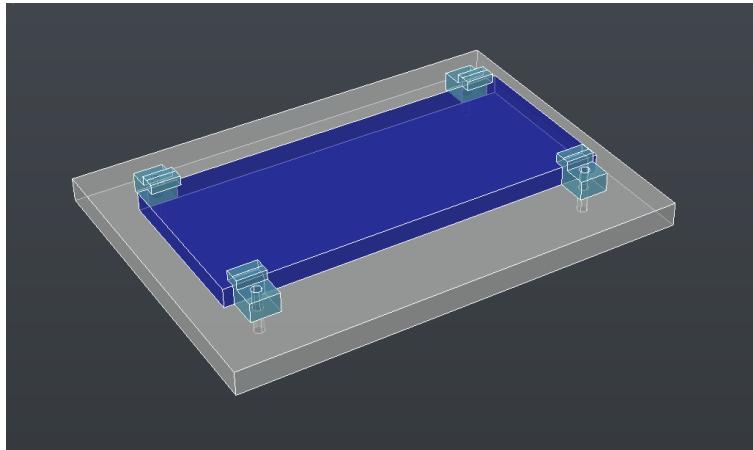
Enclosure: External View of Lid with Solar Panel Attached using Custom Holders
